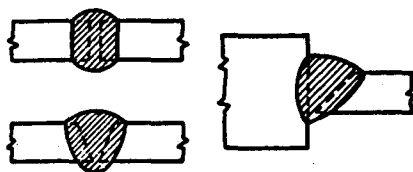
EXAMPLES OF BUTT WELDS
